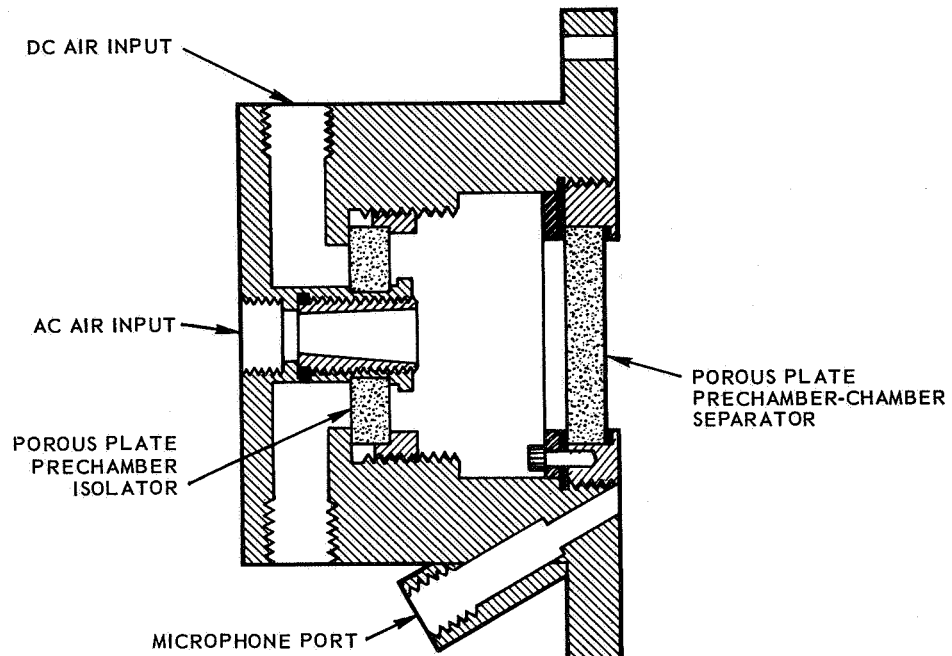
Cross-Sectional View of the Prechamber Assembly Used to Unite the Steady and Pulsing Flows Prior to Entering the Model Chamber.
